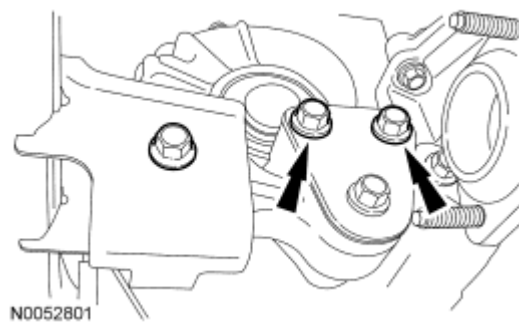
Locating Engine Roll Restrictor Bracket Bolts
